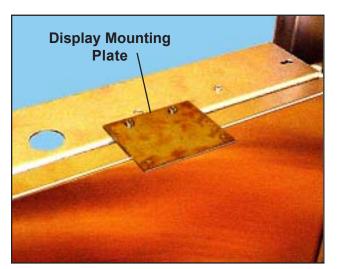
Mounting Plate on Sliding Carriage Cross Member
